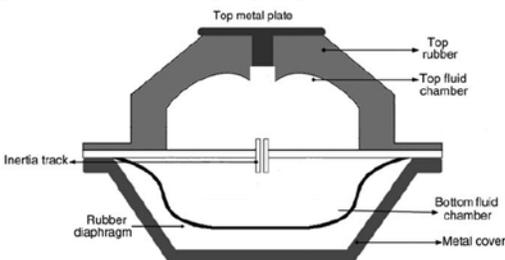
(a) Typical single pumper hydraulic engine mount [38].
